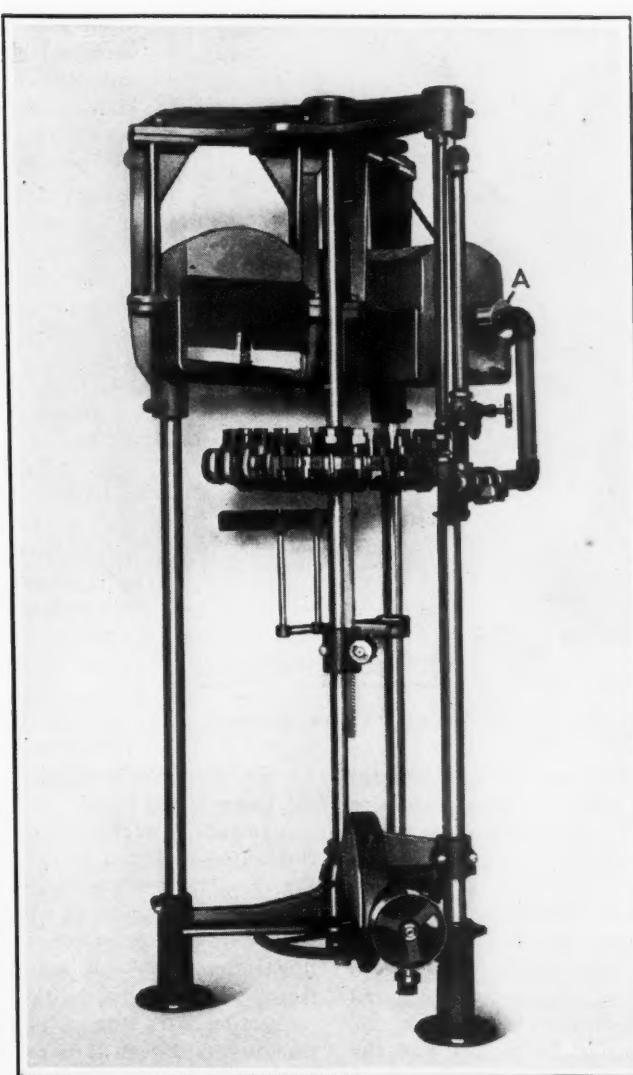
Rotary Gas Furnace in which the Blanks are heated at the End prior to swaging
